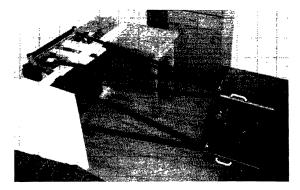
Finding the balance axis of tube assembly with dummy mirror in place.
